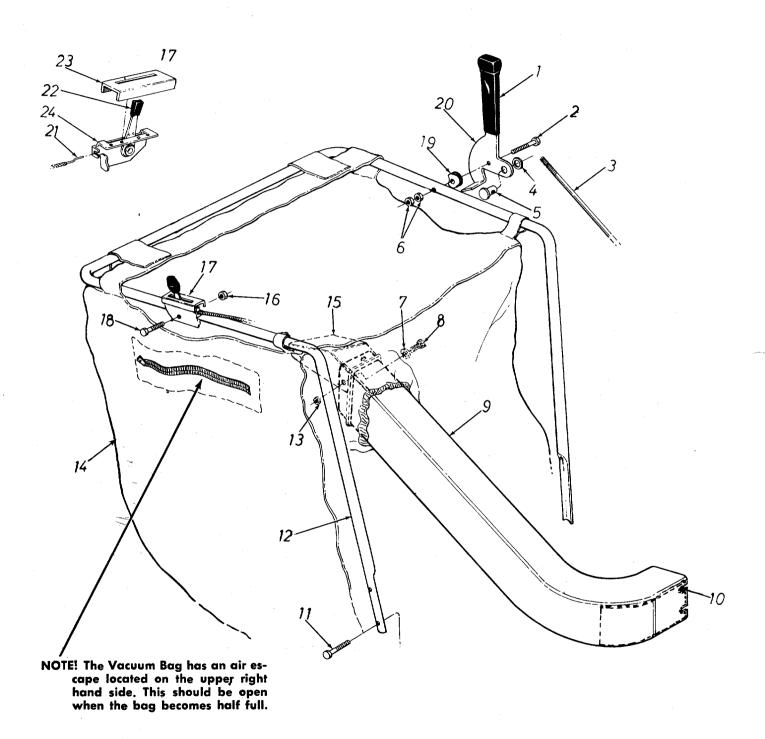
EXPLODED VIEW OF UPPER HANDLE
